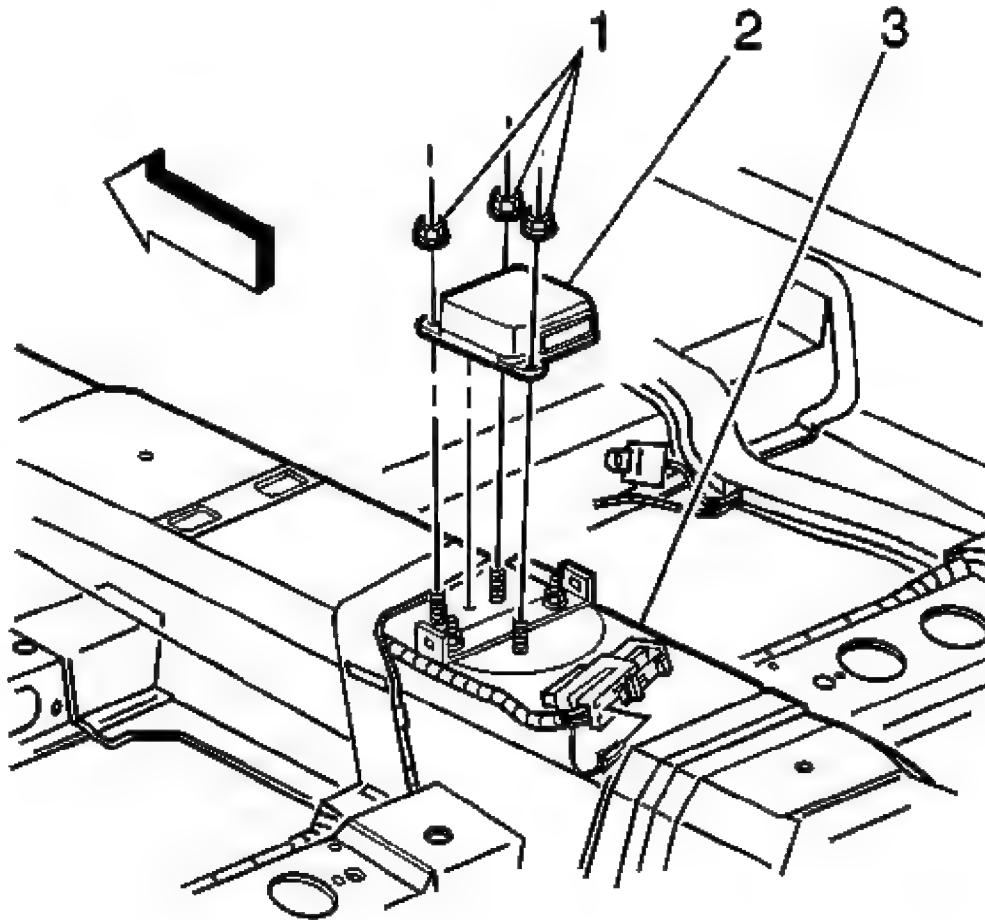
View of SDM Mounting Fasteners, SDM and Console Floor
